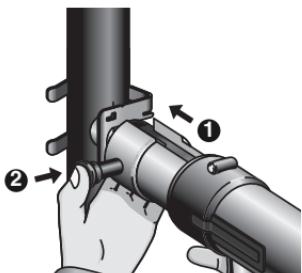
Rotate Fitting Guide To Hold Fitting In Place
